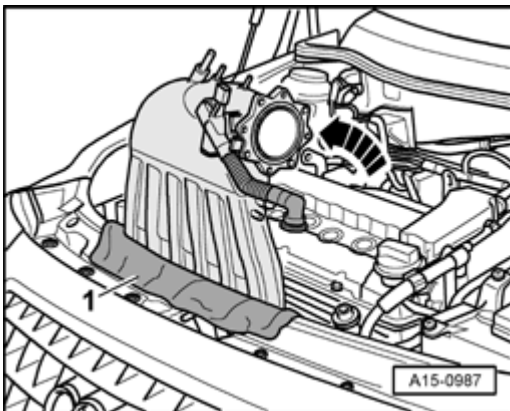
Protecting Intake Manifold From Damage With Clean Cloth & Swing Intake Manifold Forward
